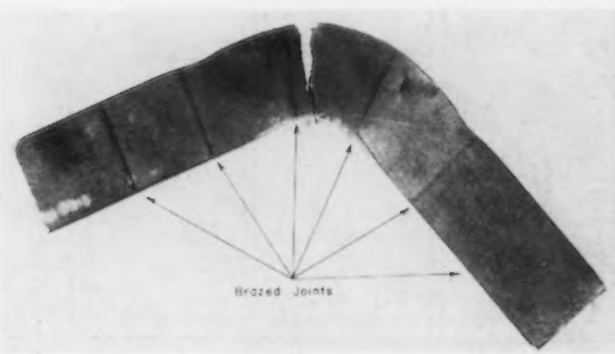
Cross-sectional transverse bend specimen from brazed transformer truck wheel. Ultimate rupture occurred in the plate material rather than in the brazed joints.
